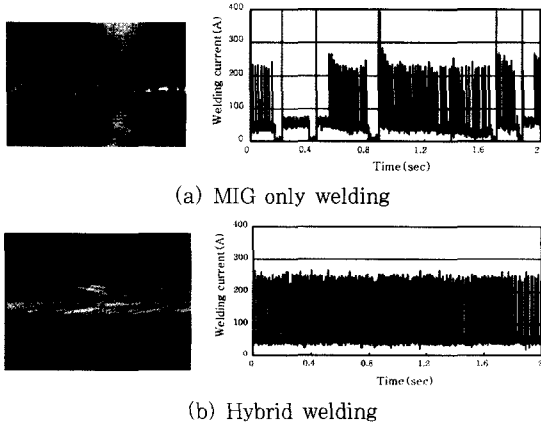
Bead appearance and current wave form according to welding condition
